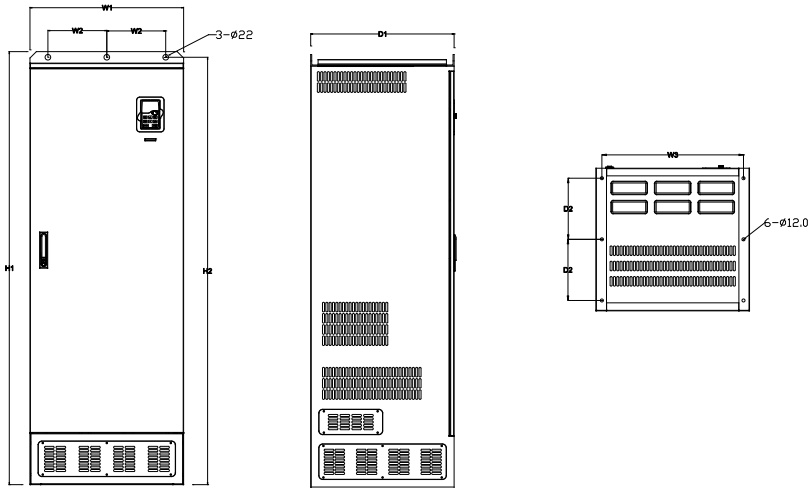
Floor installation of 660 V 400-630 kW VFDs
